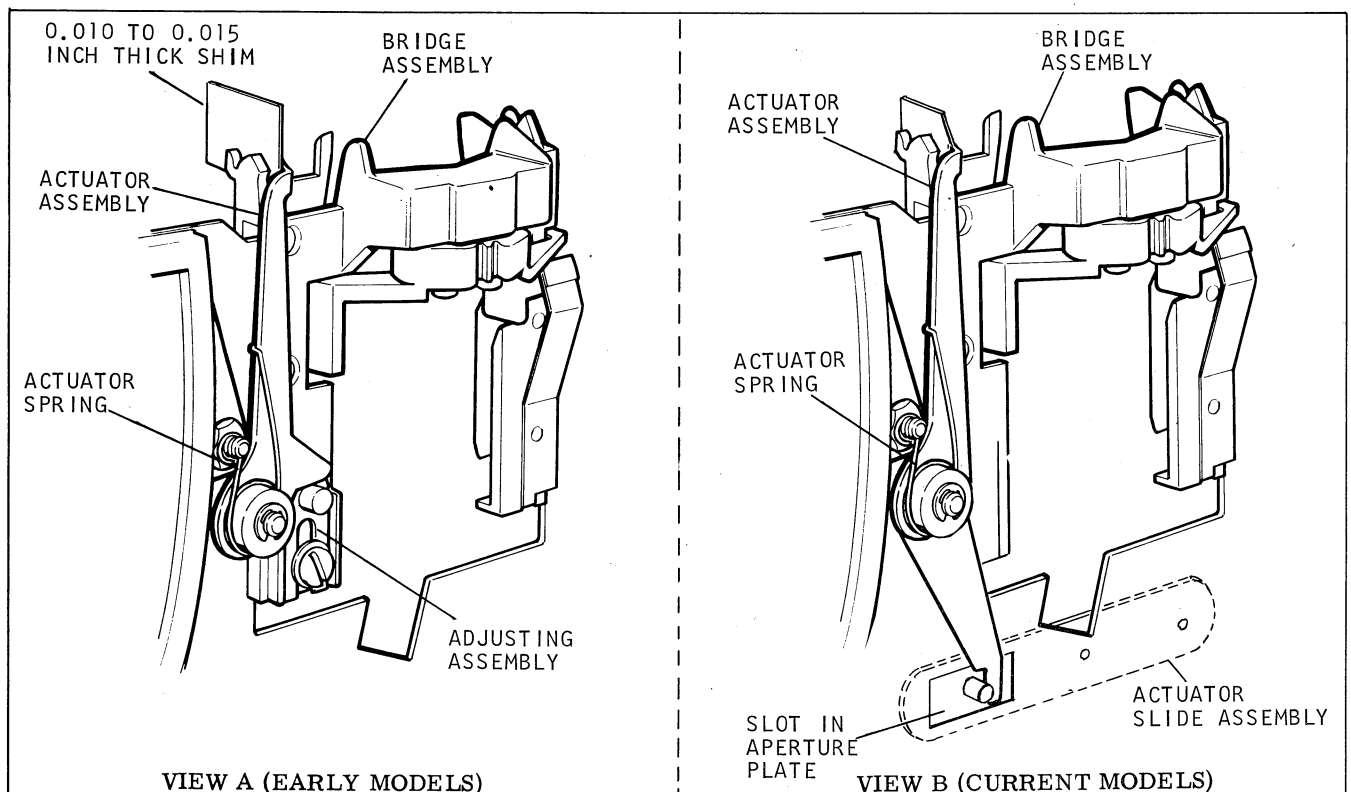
Figure G. Aligning Slide Carrier with Bridge Assembly and Positioning Tray Spring Actuator
